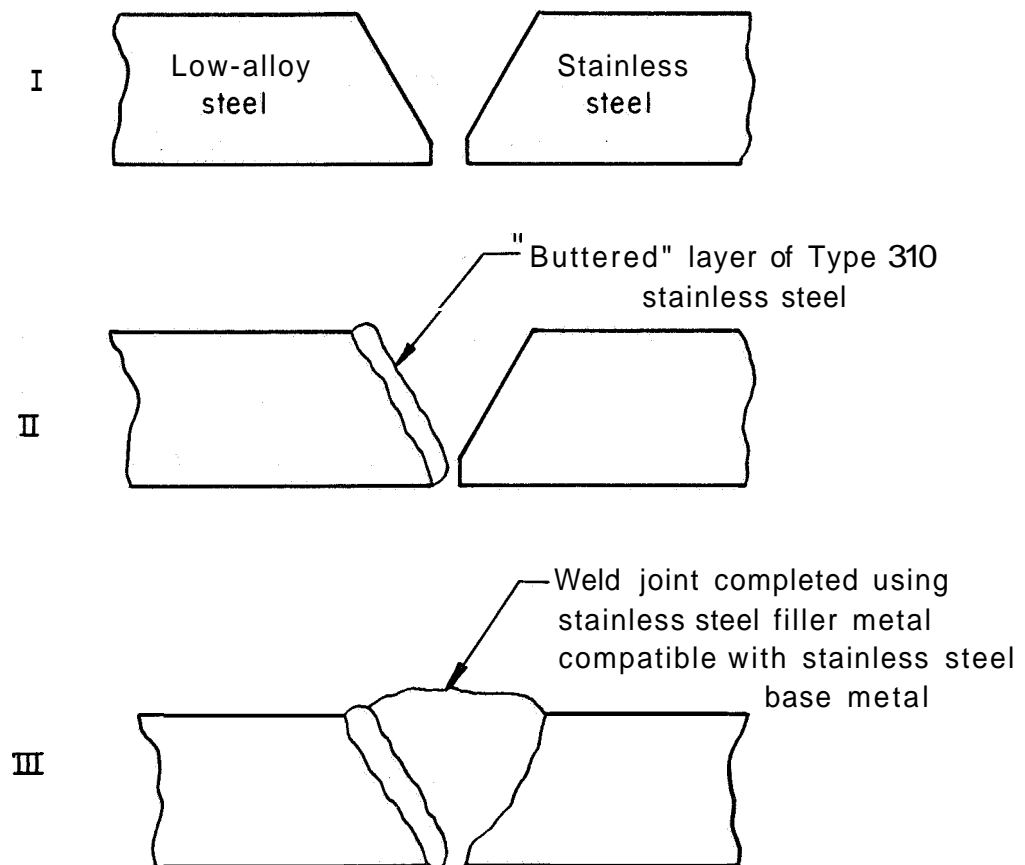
WELDING STAINLESS STEEL TO LOW-ALLOY STEEL USING "BUTTERING" TECHNIQUE
